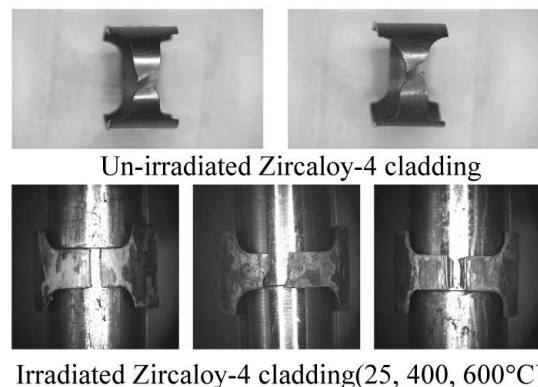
Fracture Patterns After the Ring Tensile Tests
